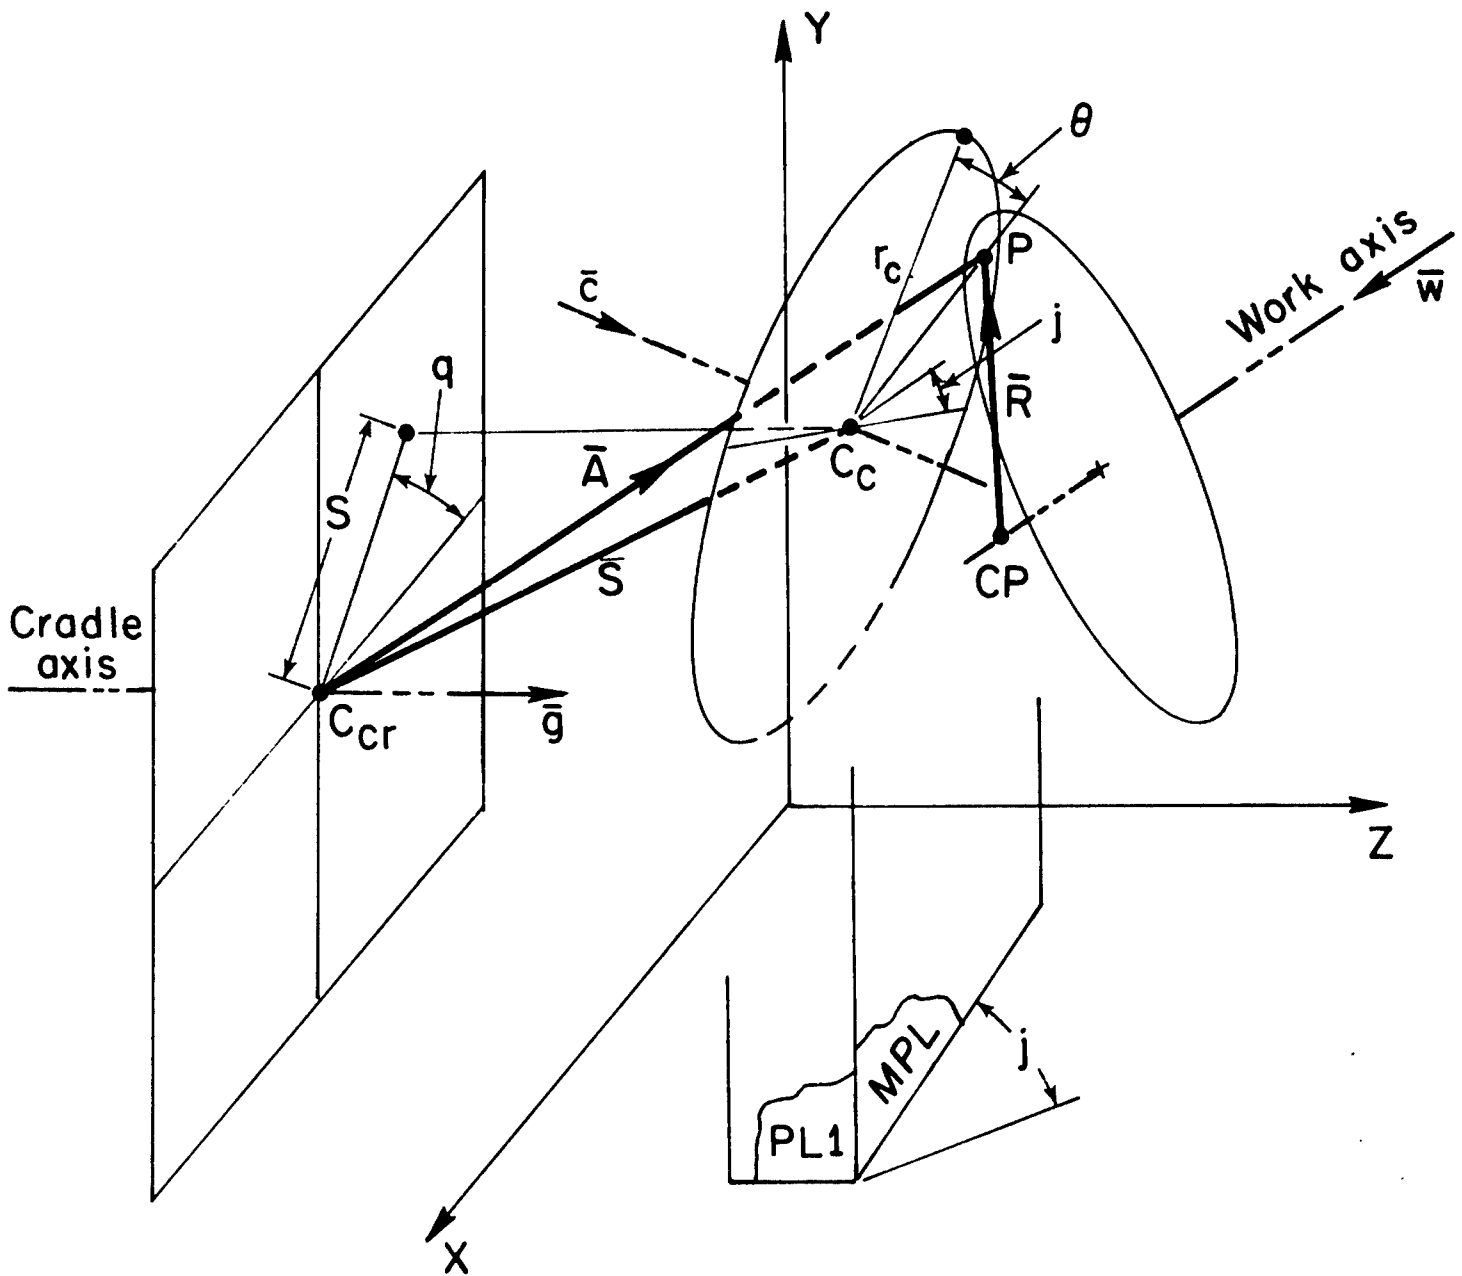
A Simplified Isometric View of Gear Generating Machine Kinematics
